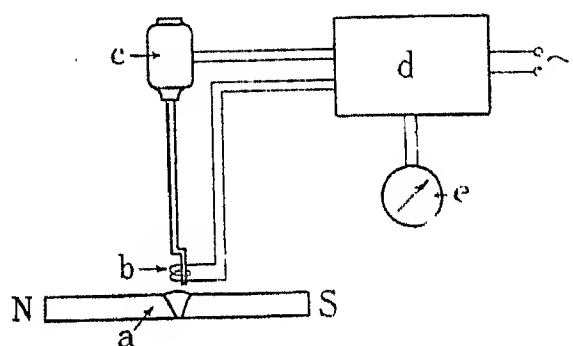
Circuit of the I.G. welded-seam tester.
